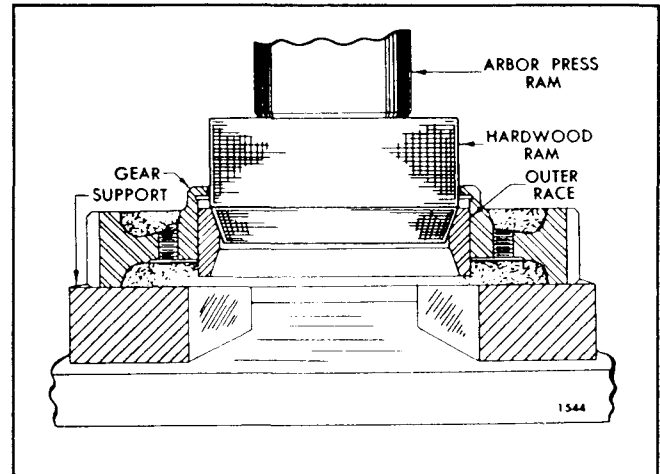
Hardwood Ram for Pressing Outer Bearing Race from Gear
